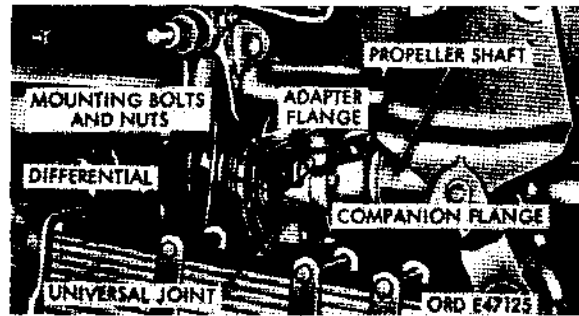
Disconnecting transfer-to-front axle propeller shaft
